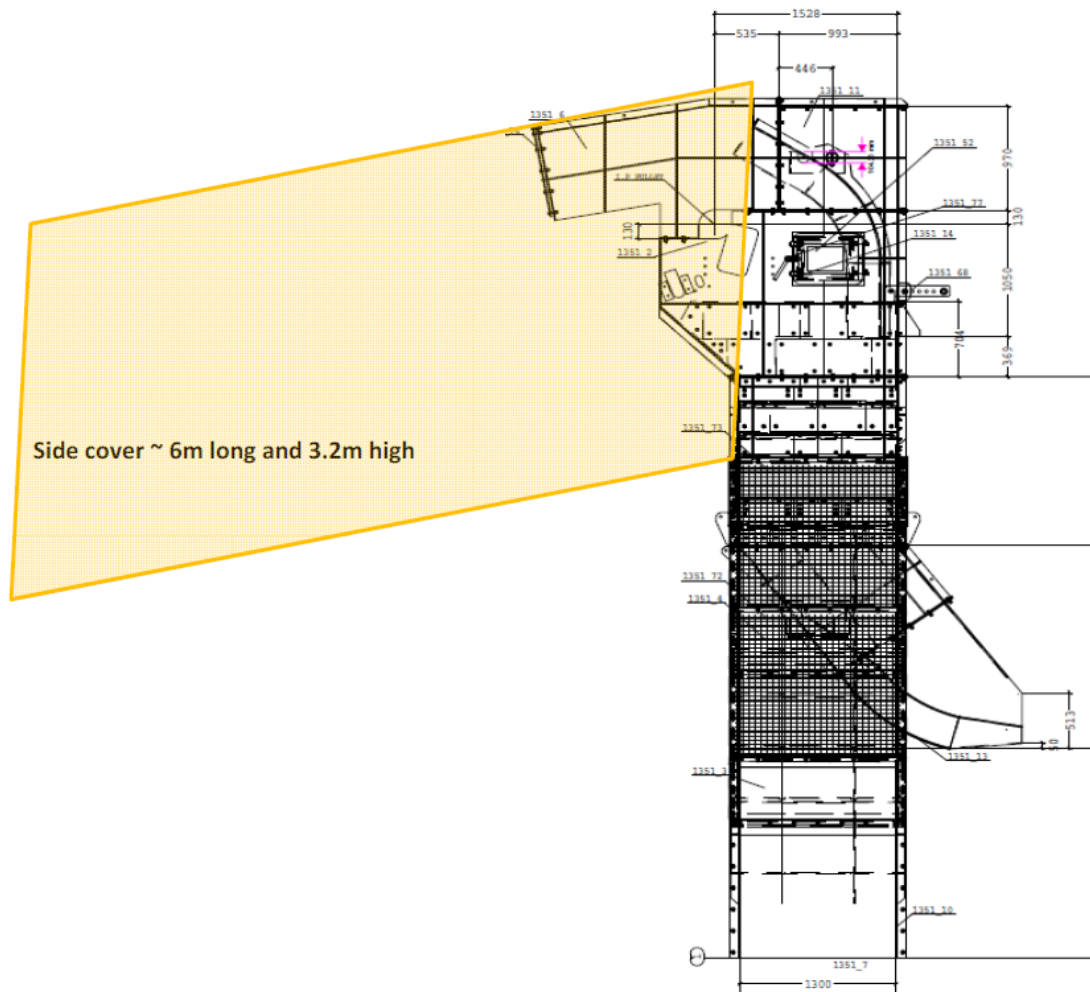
View of the Tripper enclosure structure – from drawing 11001-1350-1.
